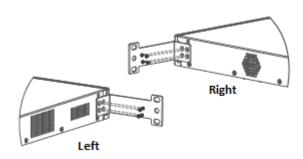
Attaching the Mounting Bracket to RG-ES226GC-P
